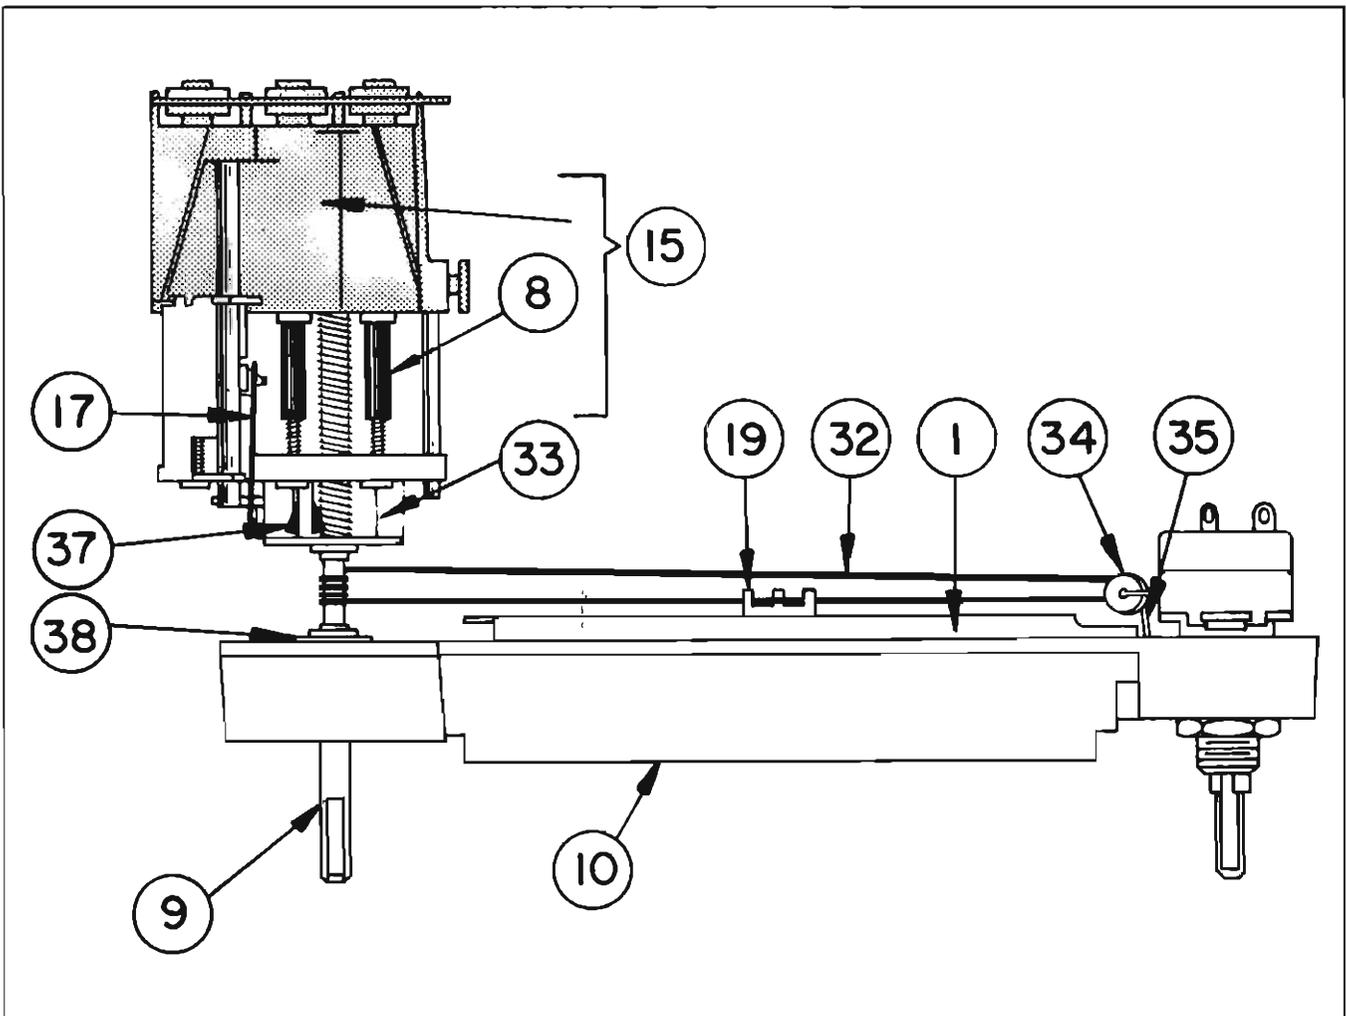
TUNER PARTS LAYOUT AND DIAL CORD VIEW - ALL MANUAL TUNED RADIO
